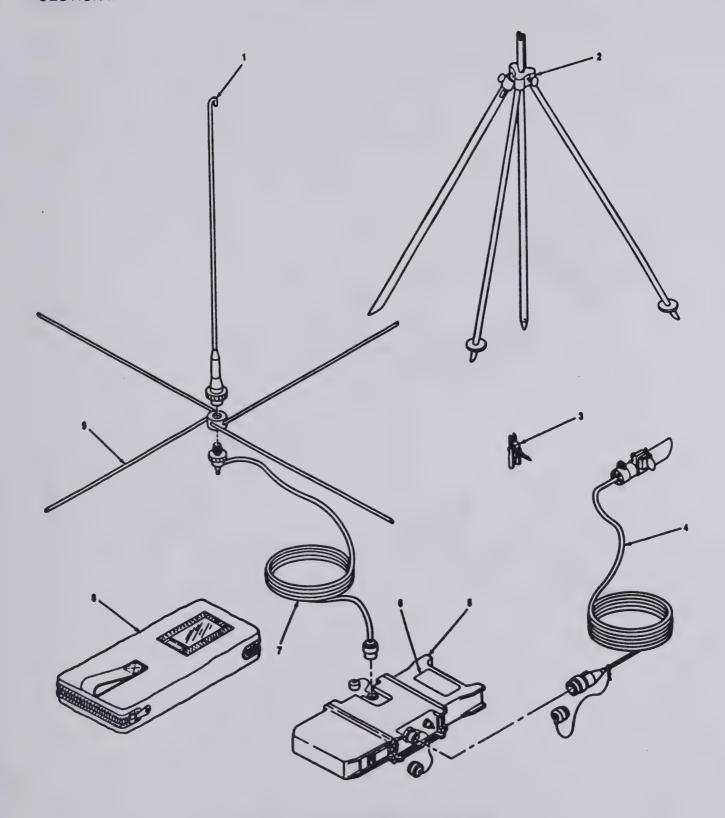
Sensor Set, DT-565A/GSQ (Sheet 1 of 2)
